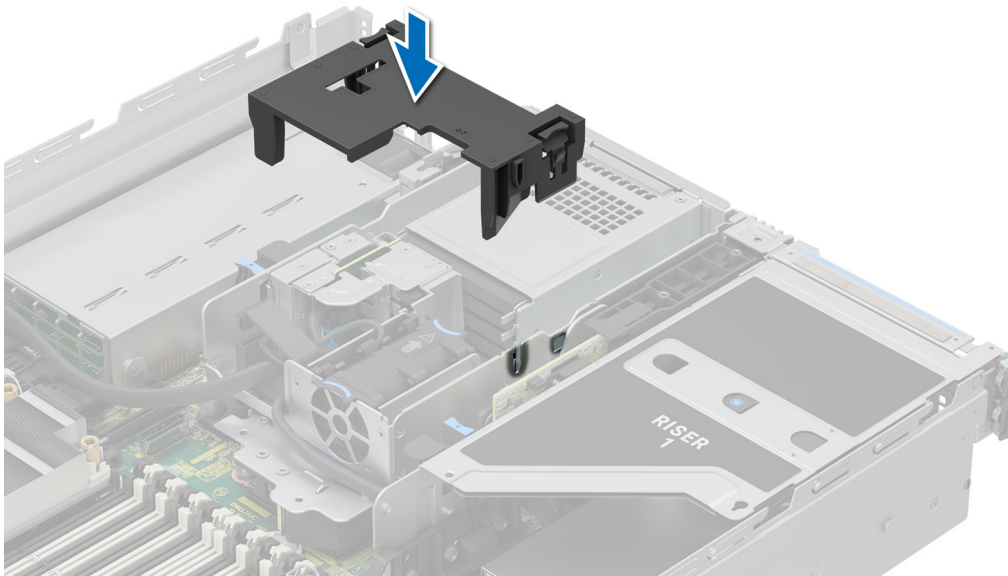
Installing the EDSFF E3.S rear drive module air shroud
